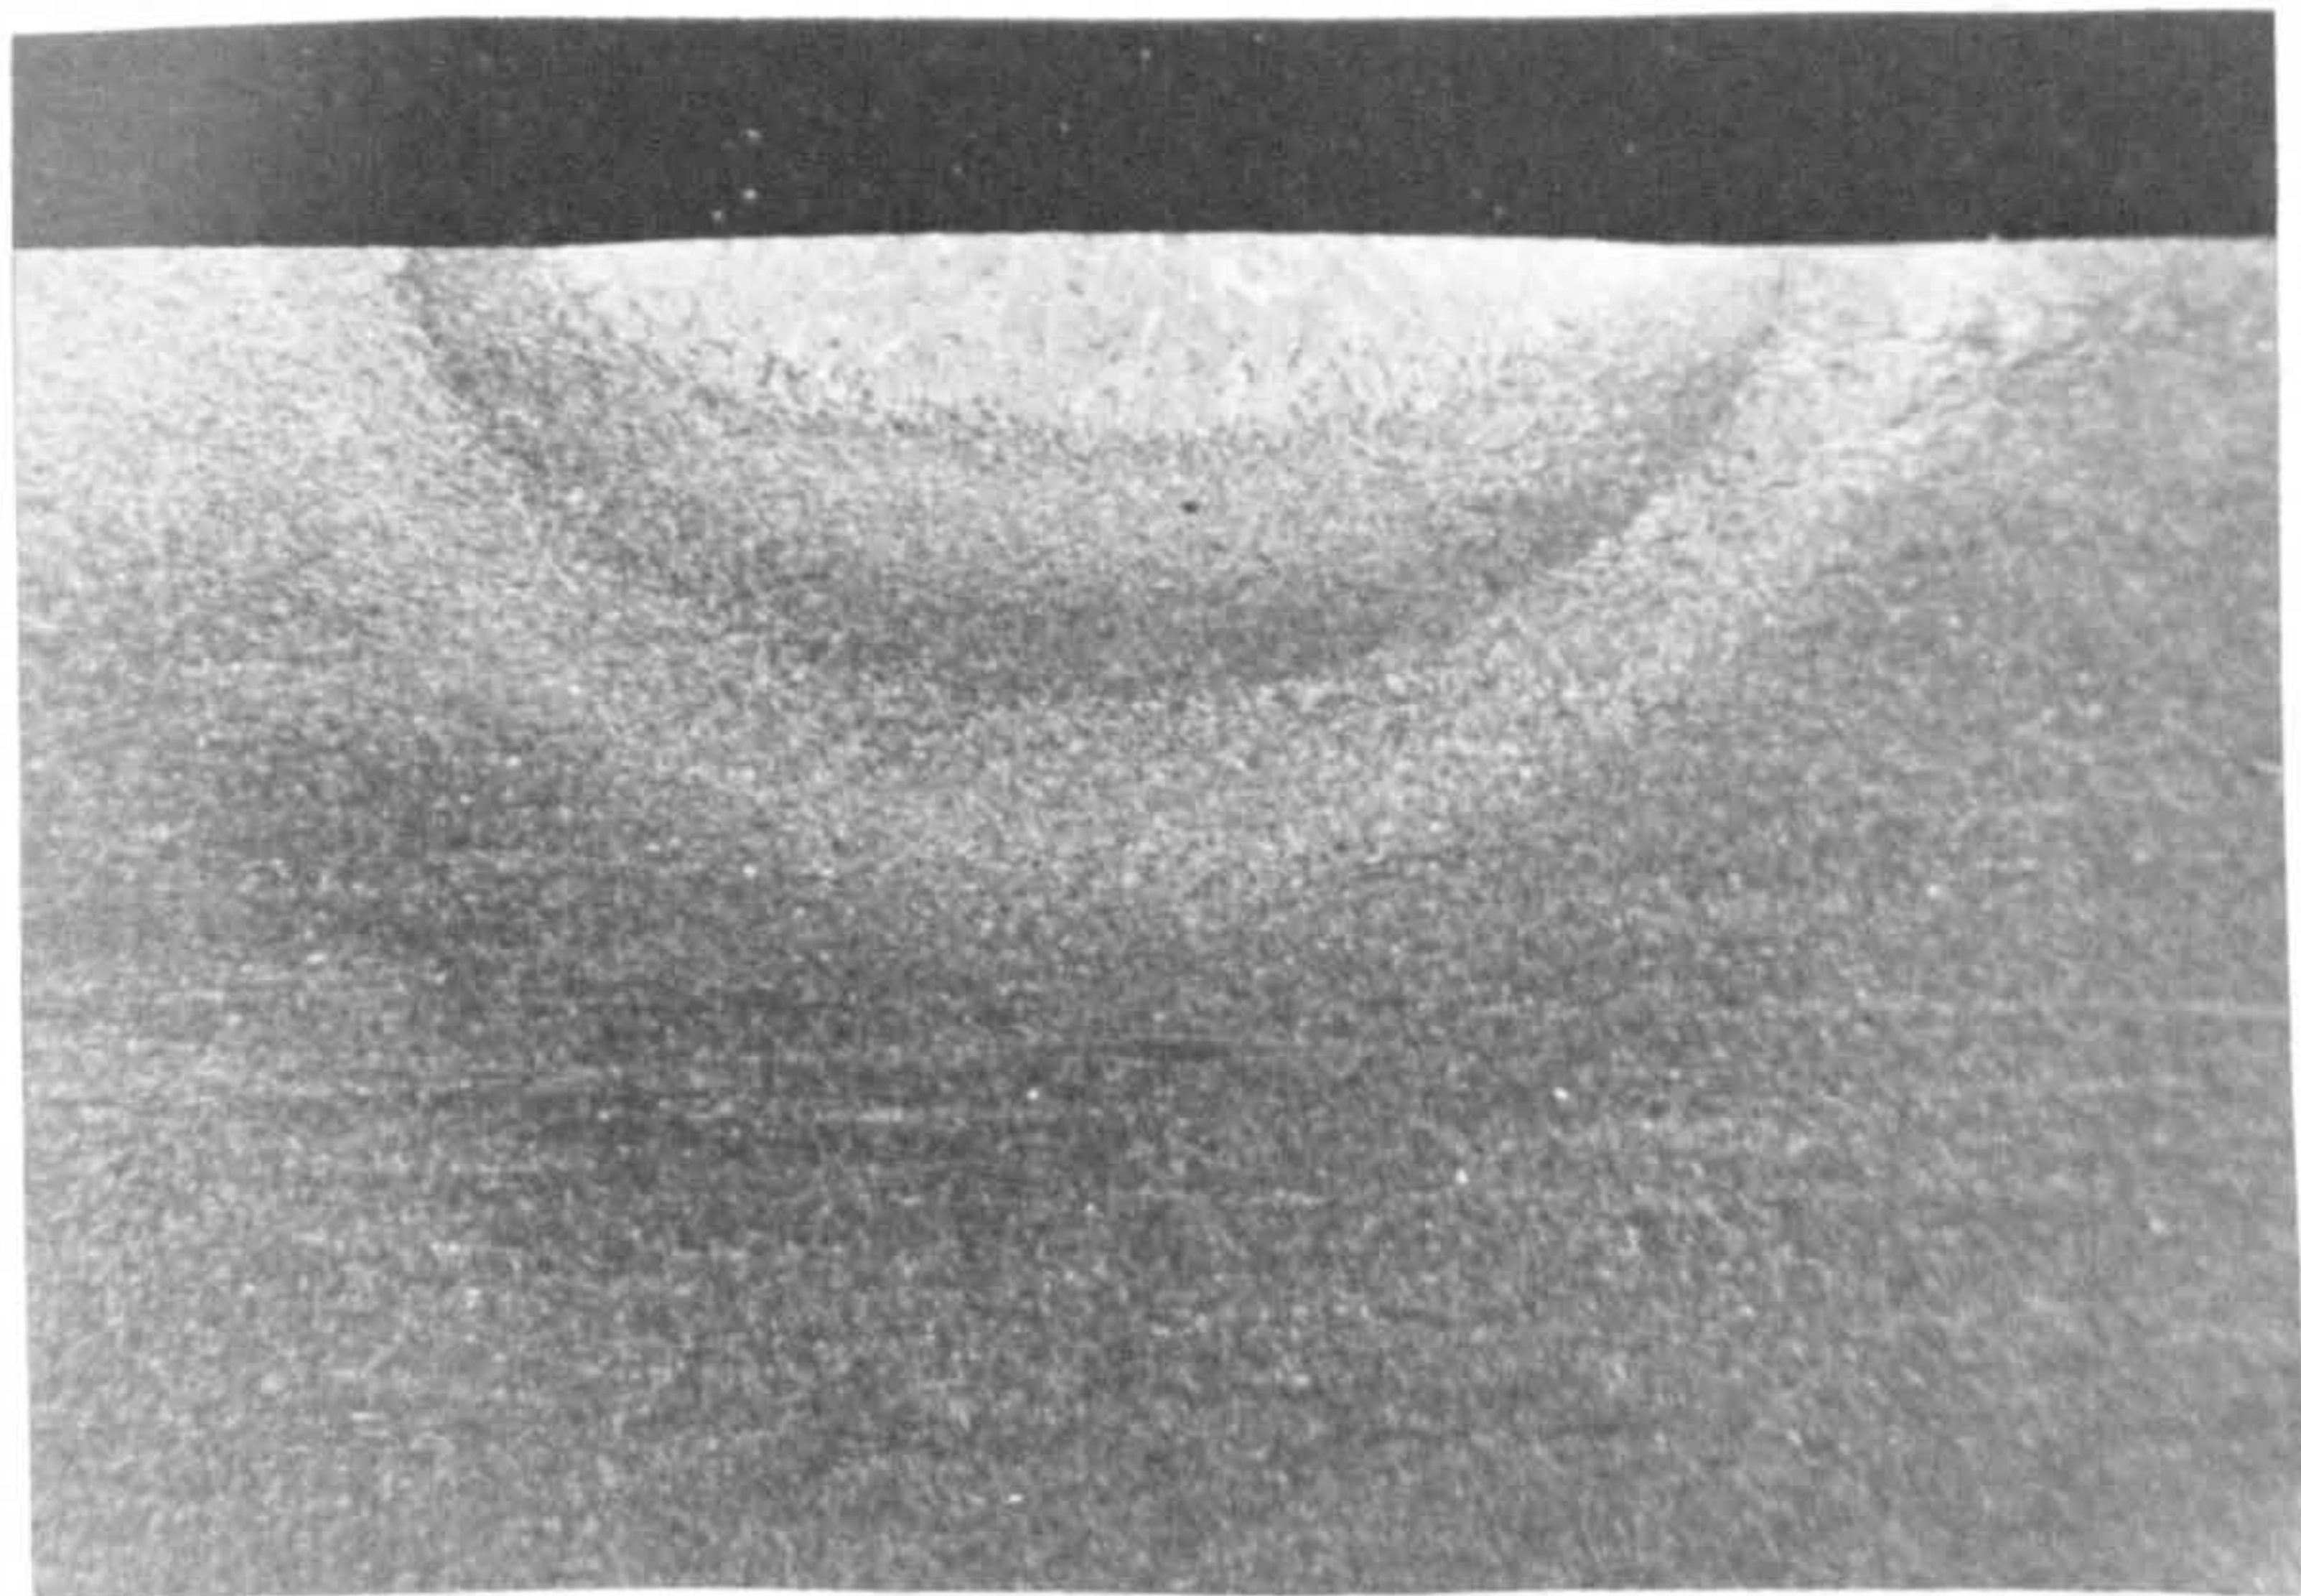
The weld bead profile of a 0.57kJ/mm Zeron 100 autogenous bead on plate weld performed at 1bar (x5).
